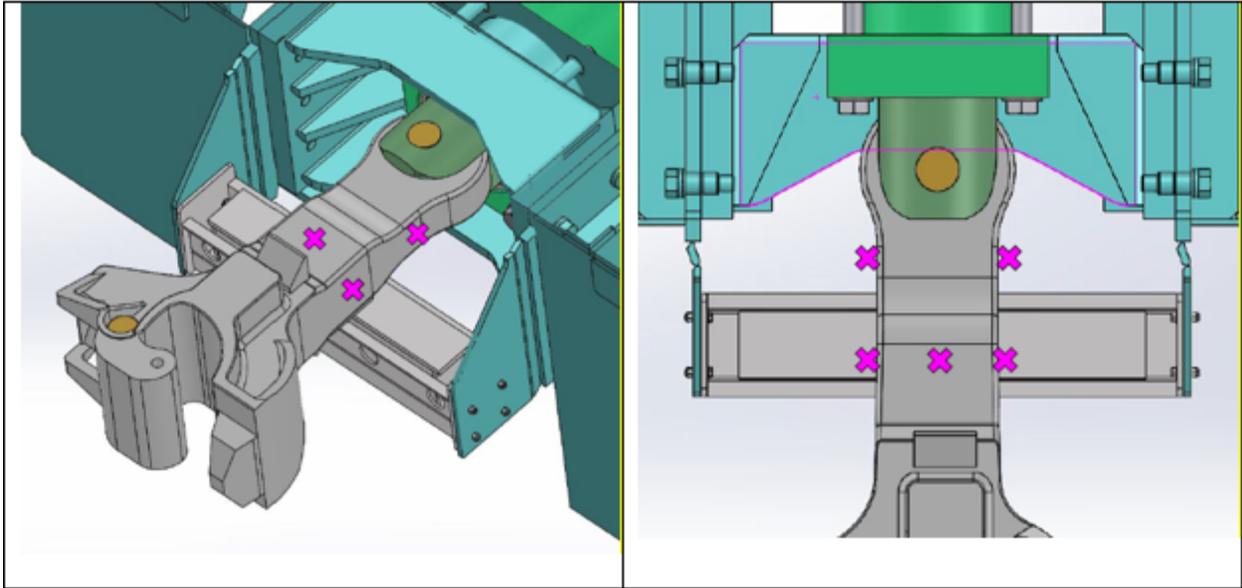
Strain Gage Locations on the M1 Passenger Car Front Coupler
